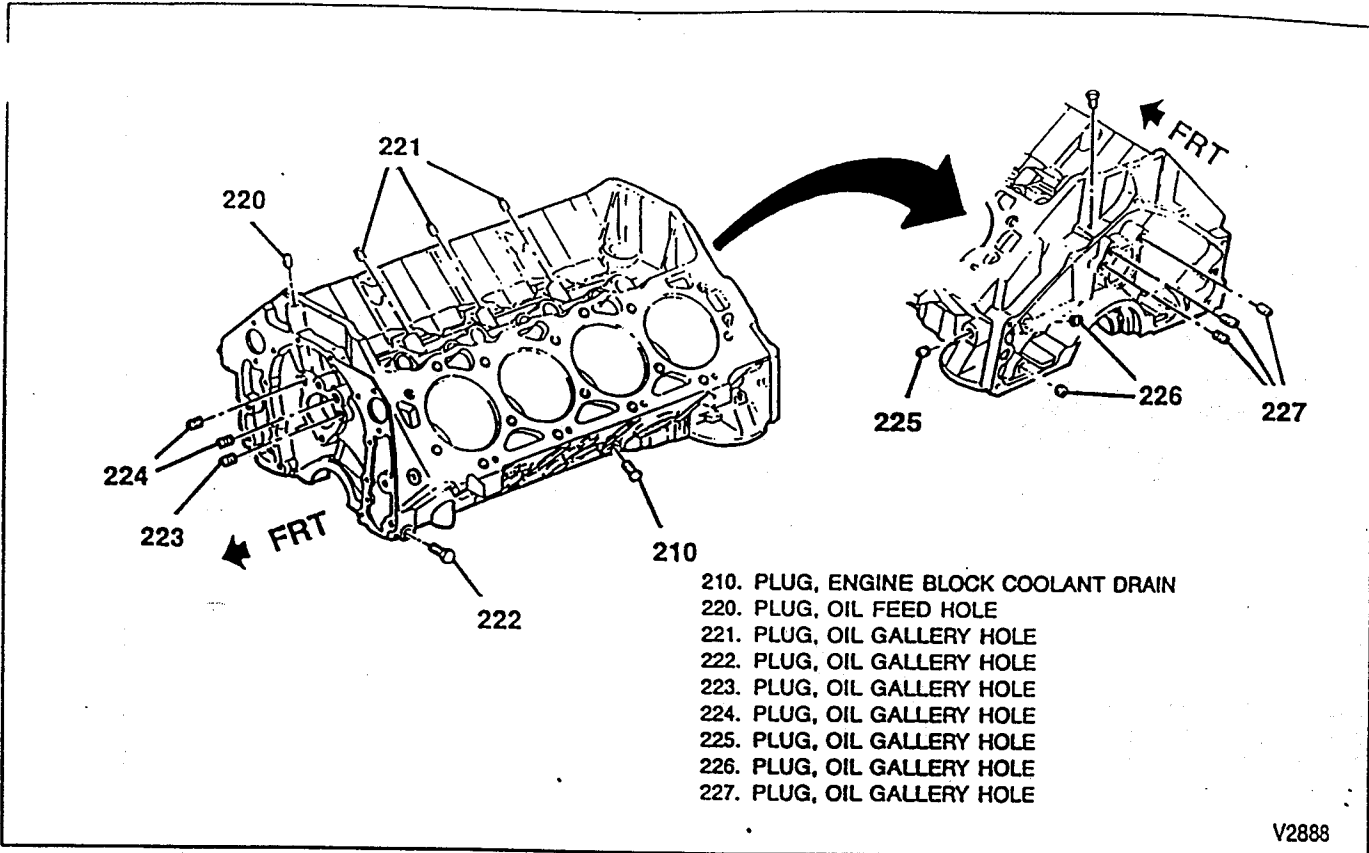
Engine Block Oil Gallery Hole and Coolant Drain Hole Plugs (7.4L Engines)
